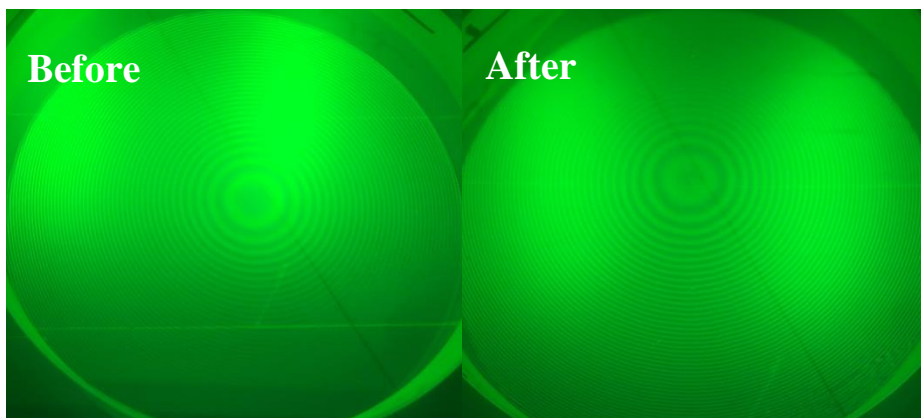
Test before and after polishing using non-rotating tool for 60 min with epicyclic tool path.
